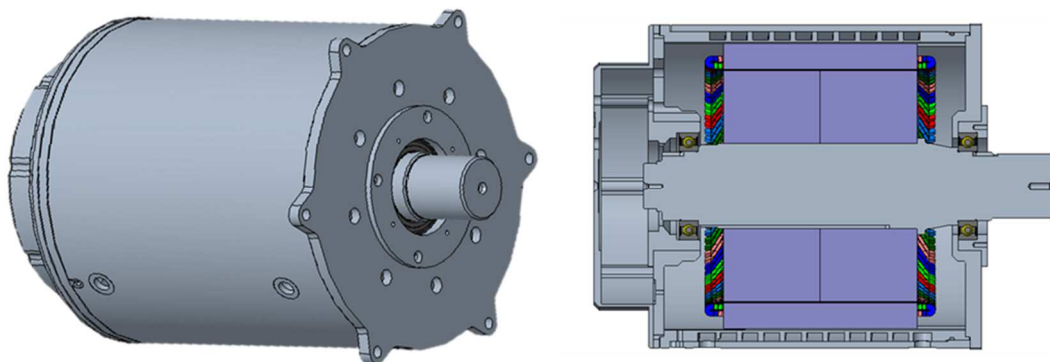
Mechanical design of the secondary electric machine with housing and rotor shaft
